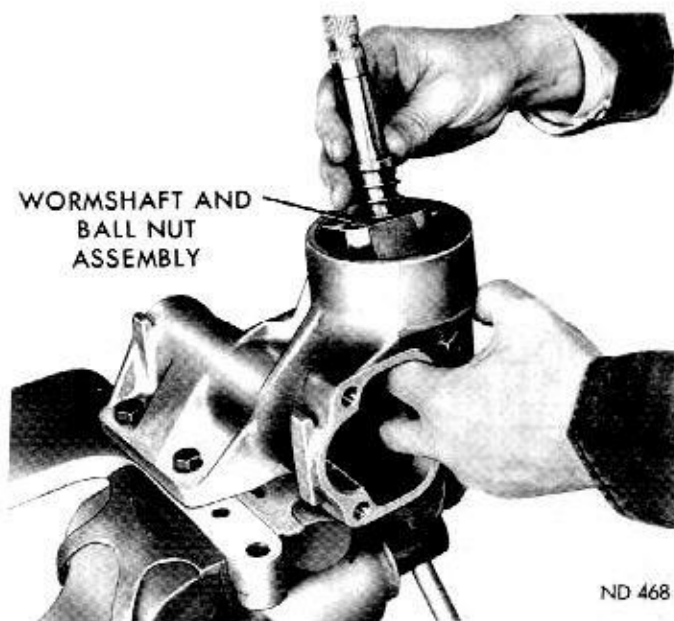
Removing Worm Shaft and Ball Nut Assembly
